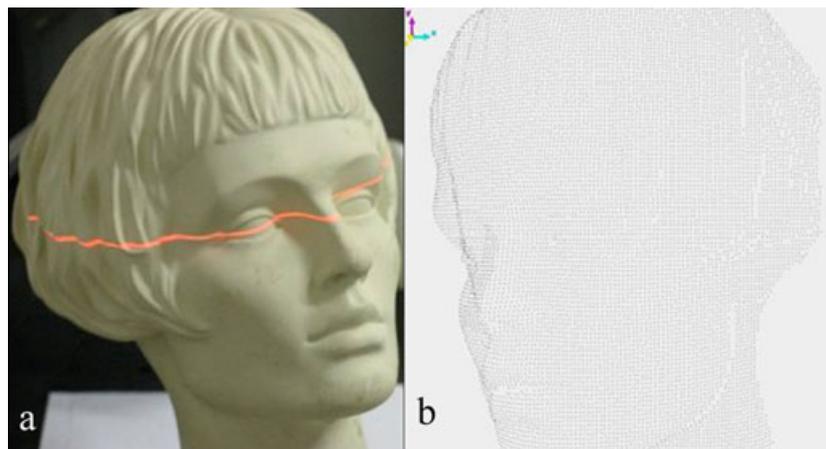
The 3D optical digitizer measurement principle. (a) The deformation of the laser stripe induced by the object shape; (b) the whole point cloud of the inspected part.
